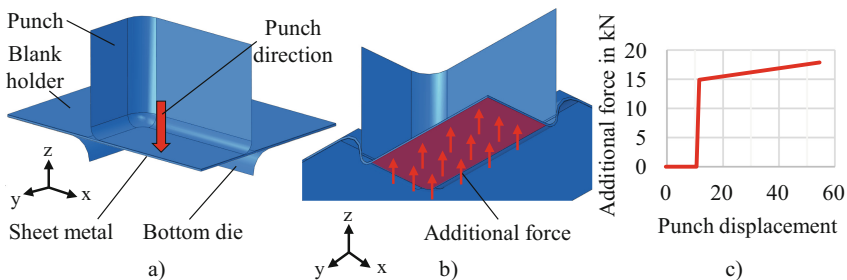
Tool setup for deep drawing with additional force transmission
